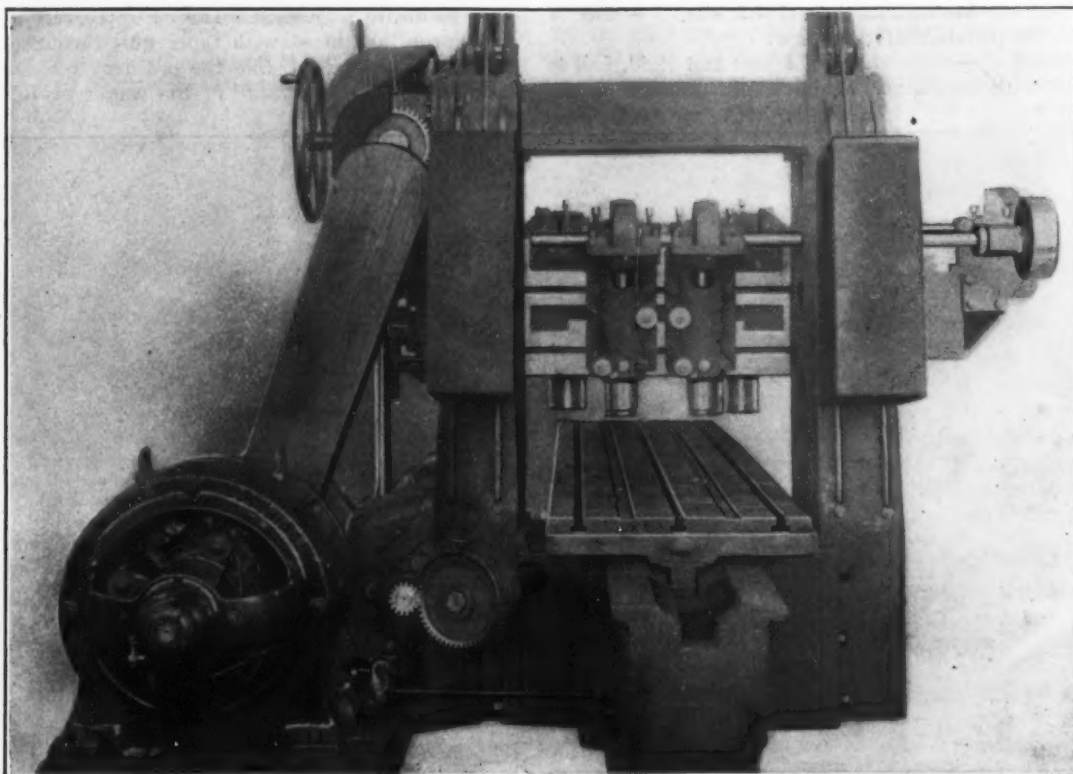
A Rear View of the Four-Head Machine, Showing the Spindles on the Back of the Rail and the Motor Drive.
